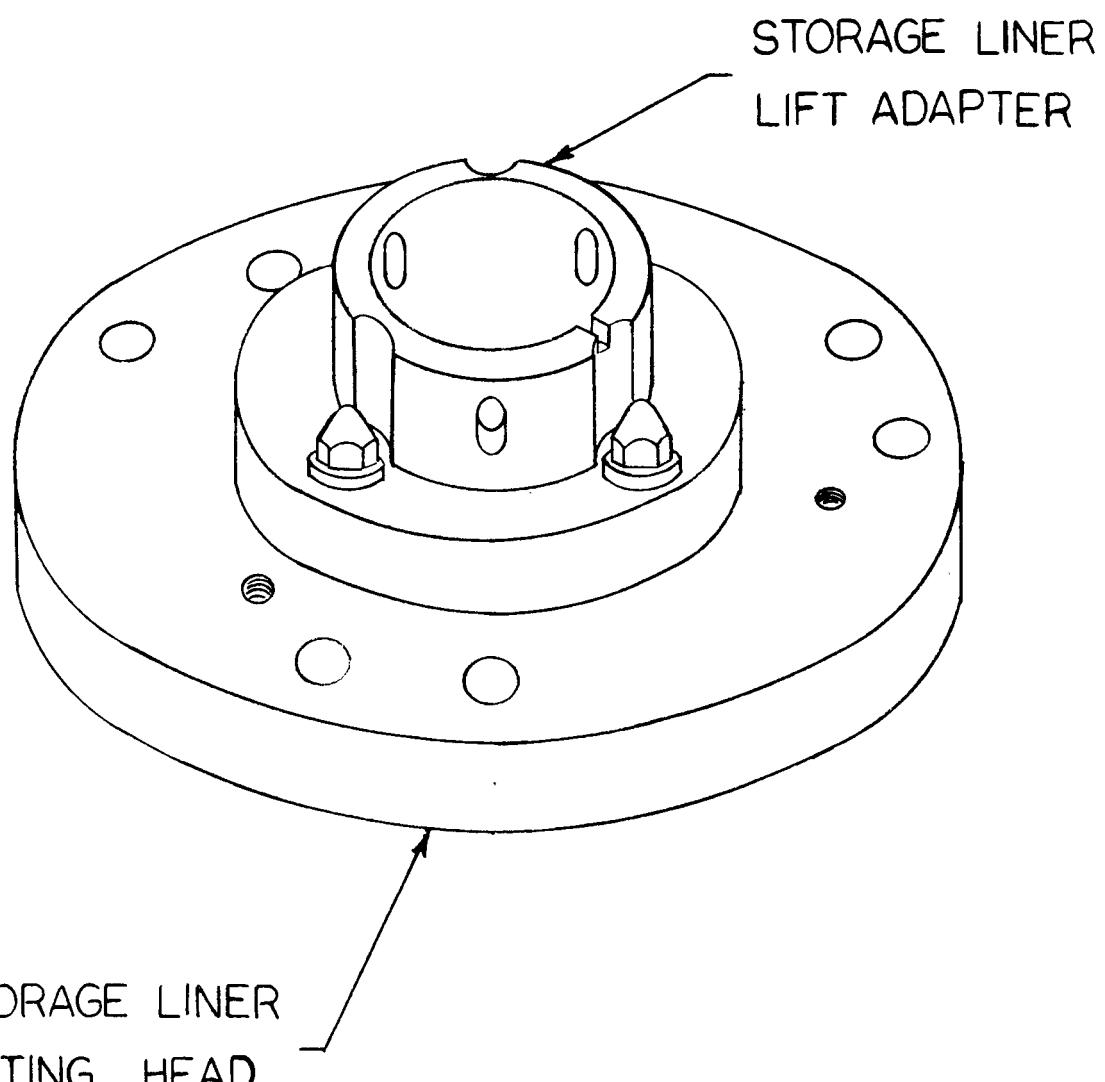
LWBR Storage Liner Lifting Head Assembly
